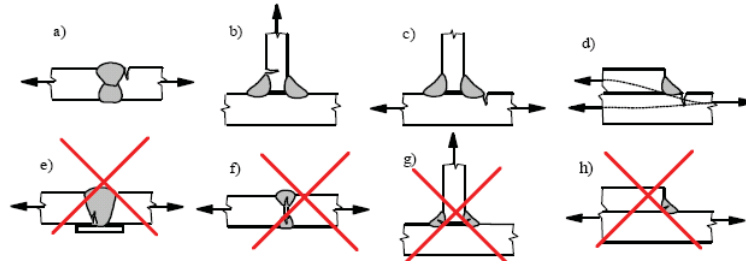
Various locations of crack propagation in welded joints. a–d) with weld toe cracks, e–h) with weld root cracks.
